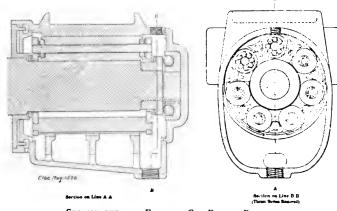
Driving Motor and Gear of Electric Postal Car.
